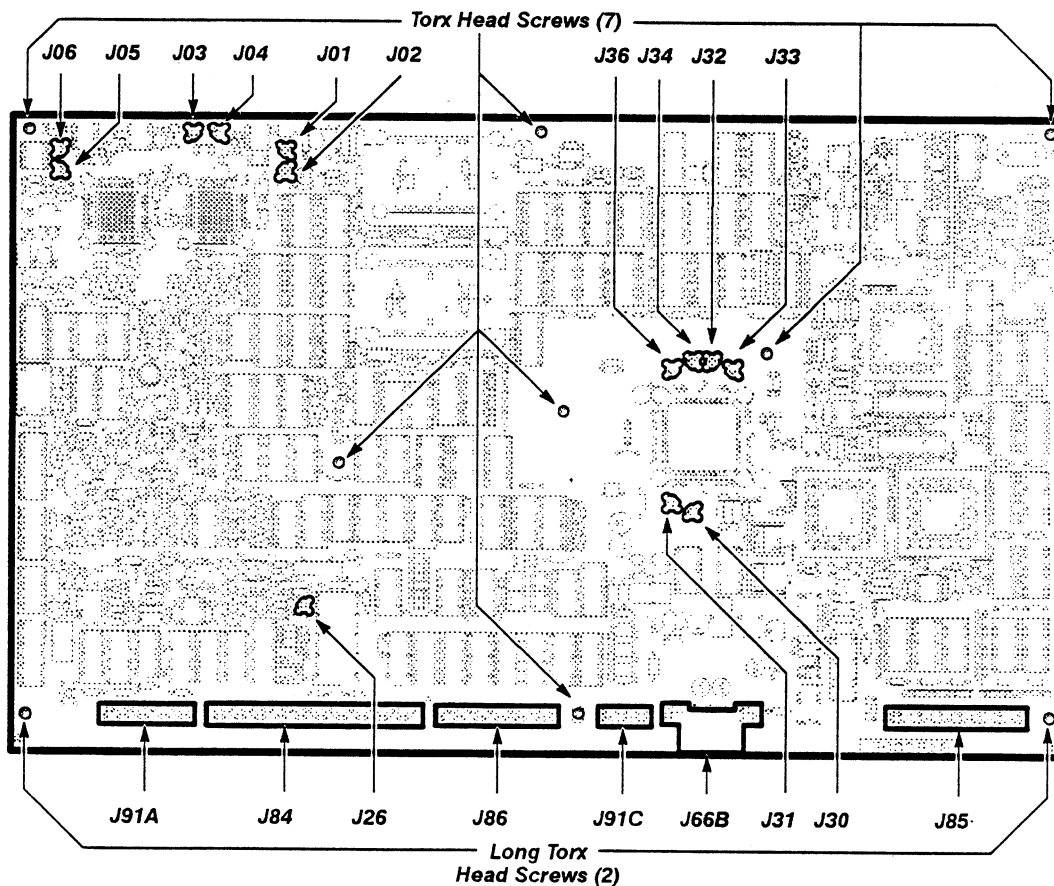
Removing/Replacing the A5 Acquisition Board
